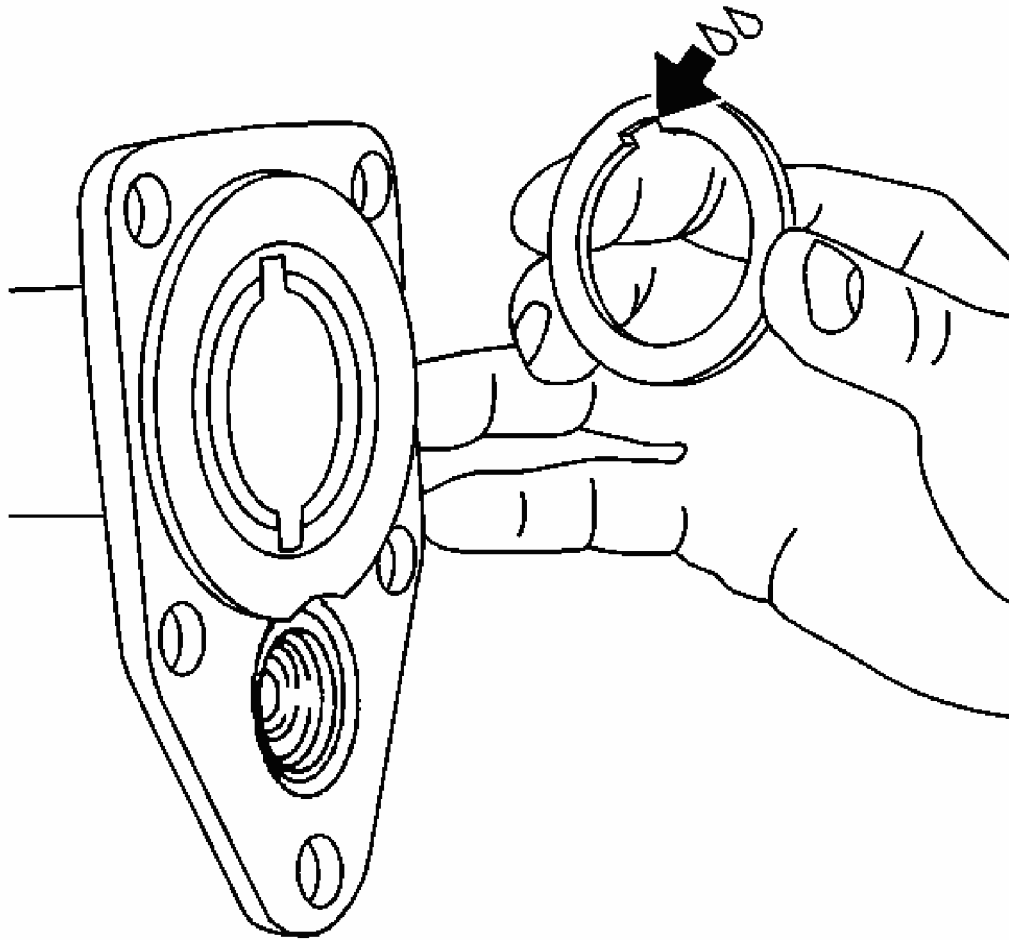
Installing Thrust Washer Into Inner Axle Shaft Housing
